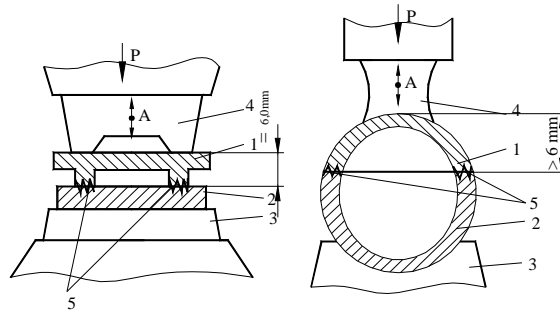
Ultrasonic welding methods of intelligent composites: A – near field welding; b – far field welding : 1 – superior piece; 2 – inferior piece; 3 – acoustic anvil; 4- sonotrode; 5 – welding zone.
